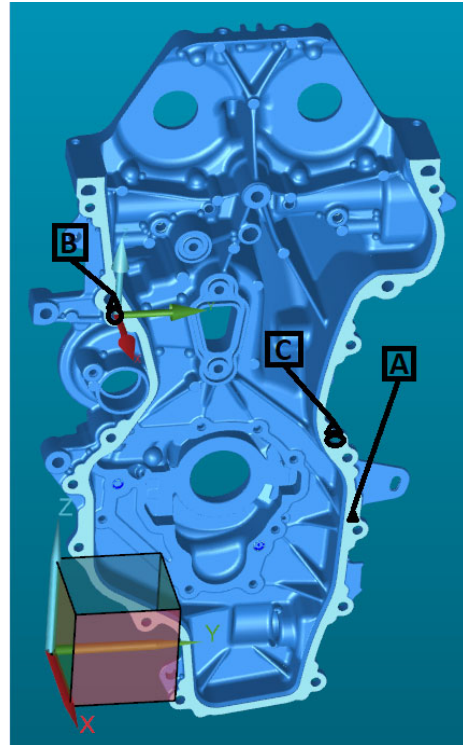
ABC drawing references = XYZ CMM axis [12].
